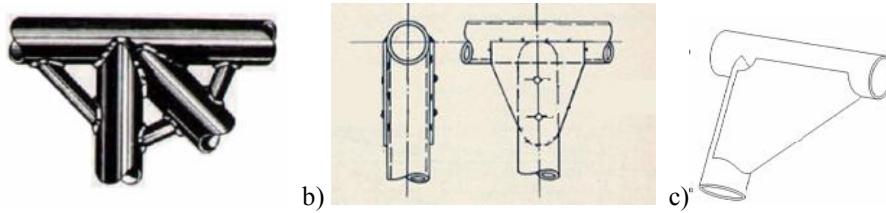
Gusset examples a) Tubular [avia-it.com]; b) Hole welded [G01]; c) “U” Shaped [*01]
